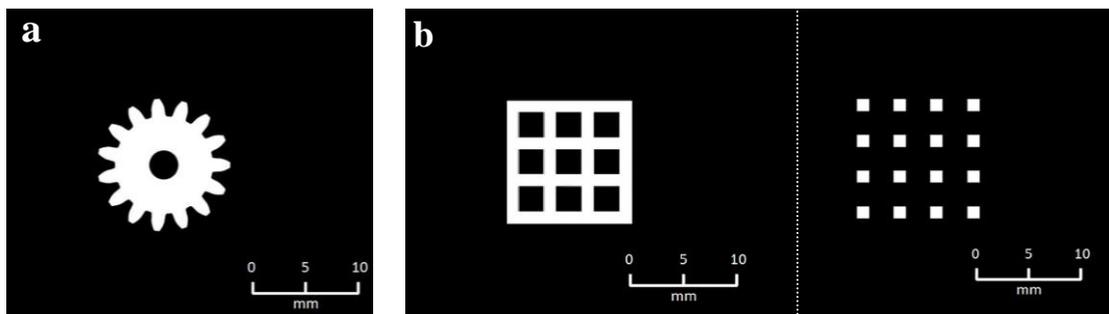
Cross sections slides. (a) Small gear. (b) Two slides for holed cube.
